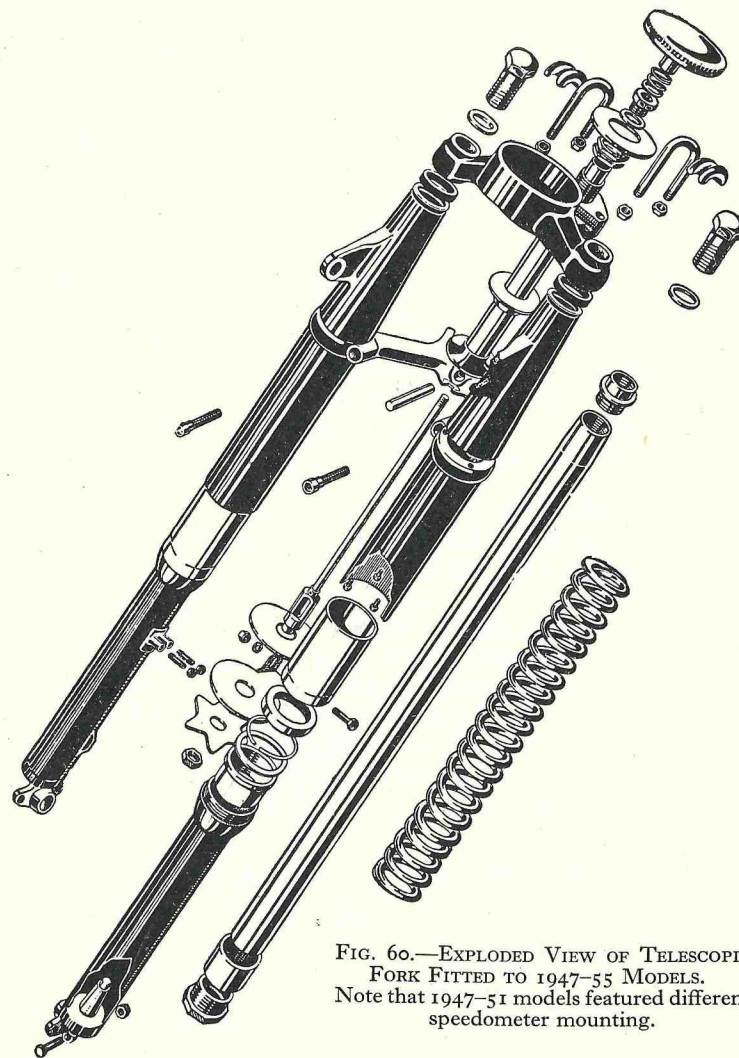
EXPLODED VIEW OF TELESCOPIC FORK FITTED TO 1947-55 MODELS. Note that 1947-51 models featured different speedometer mounting.
